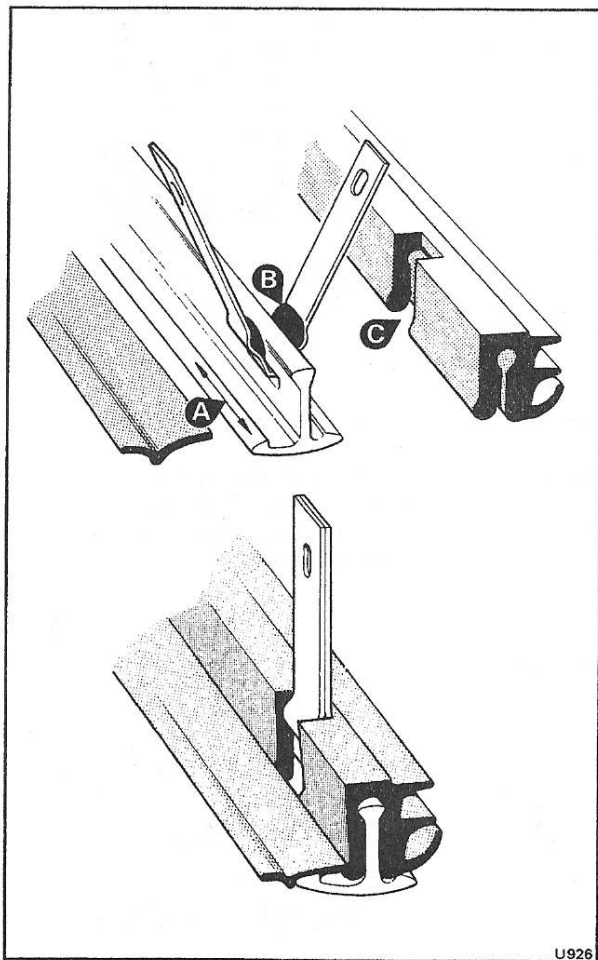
Fitting the finisher/seals assembly (Camargue)
